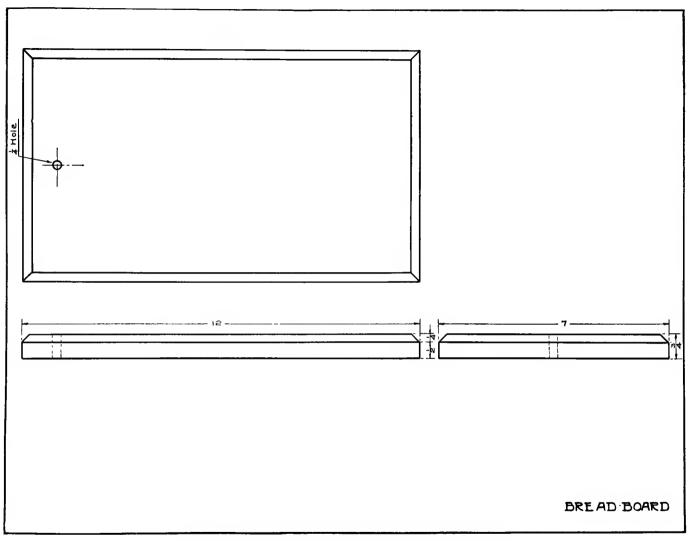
Working Drawing of Bread Board (Sixth Grade)
